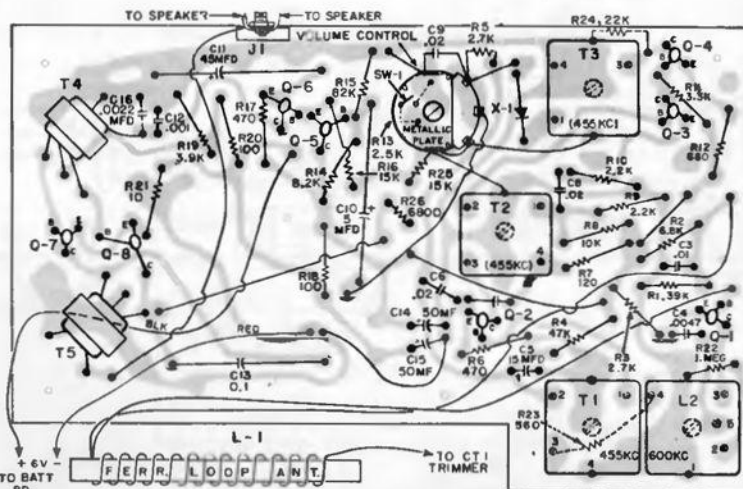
ETCHED PRINTED CIRCUIT CHASSIS 120472 (TOP VIEW)
